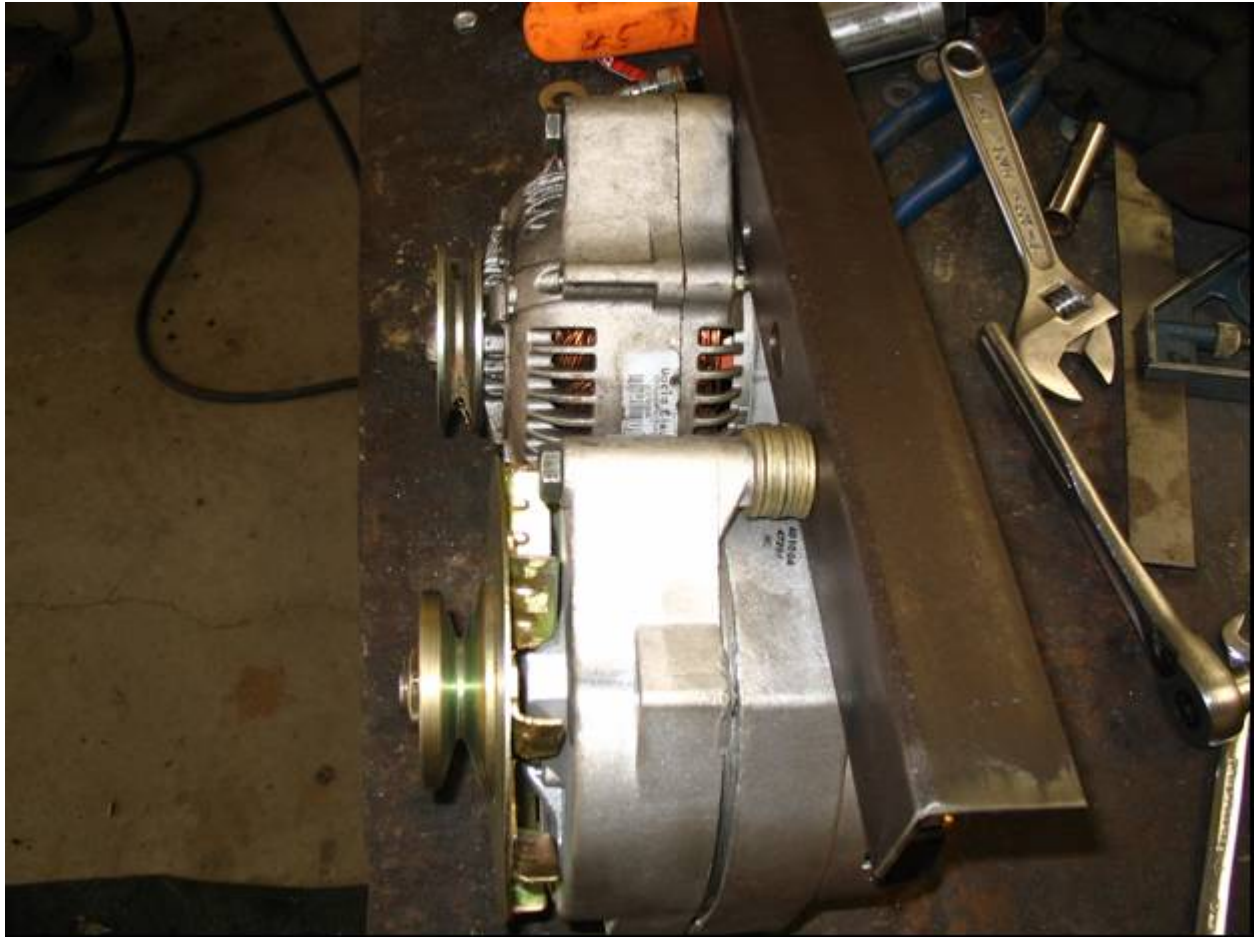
Measurement fixture; OEM alternator in the rear, Powermaster PWM-47294 alternator in front. Pulleys are lined up; note how easy it is to measure the distance from measurement fixture (the 1 ½" angle) to the front of the lower mounting tabs of both alternators. The difference in this distance is the measurement that the lower mounting bracket needs to be lengthened. Note the use of the 8 washers to move the Powermaster alternator forward.
